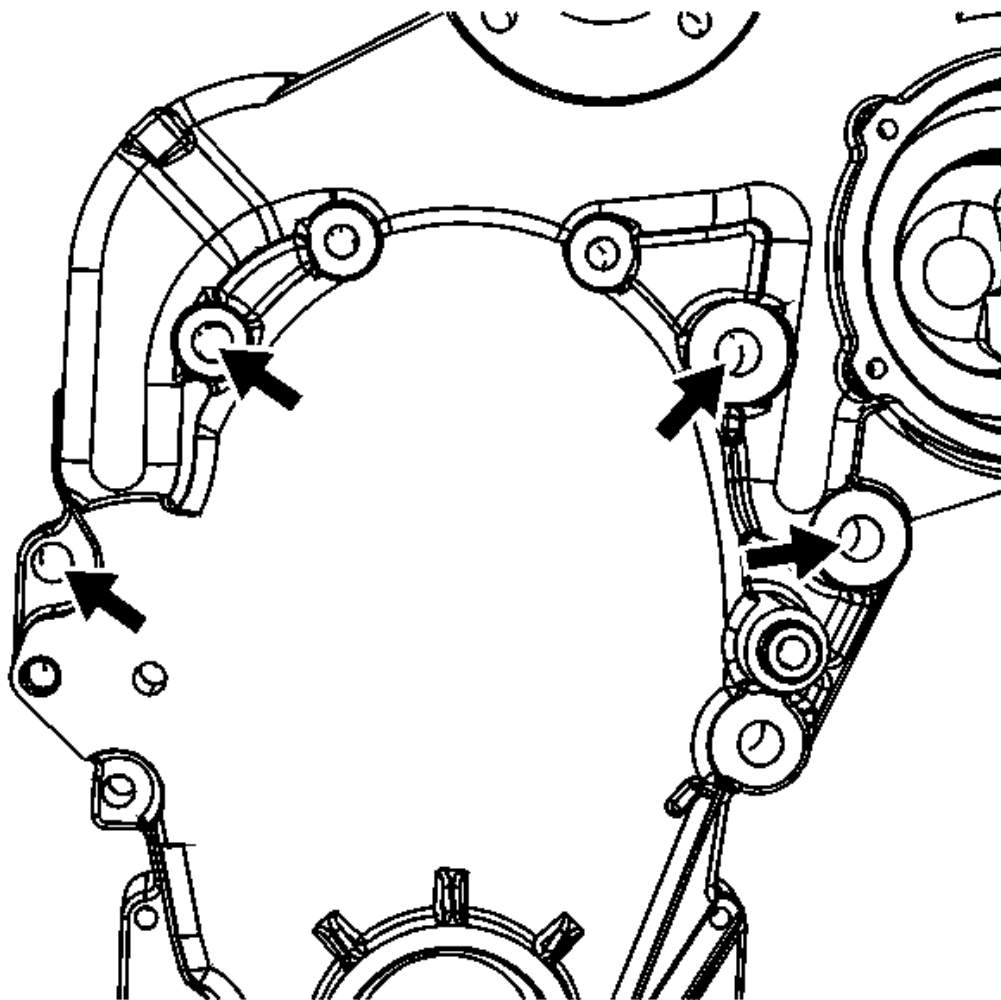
Identifying Bolt Sealer Locations In Engine Front Cover
